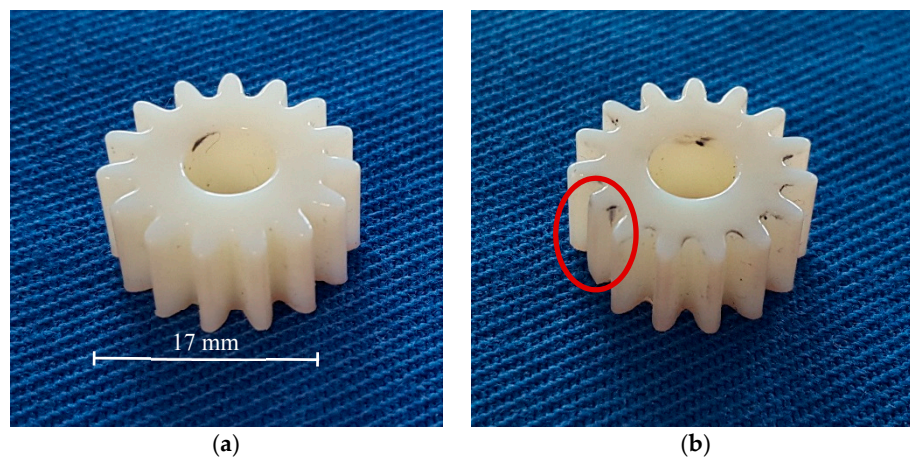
Image of the purpose made gear part without (a) and with (b) defect. (a) Without defect; (b) with defect (chipped gear tooth).
